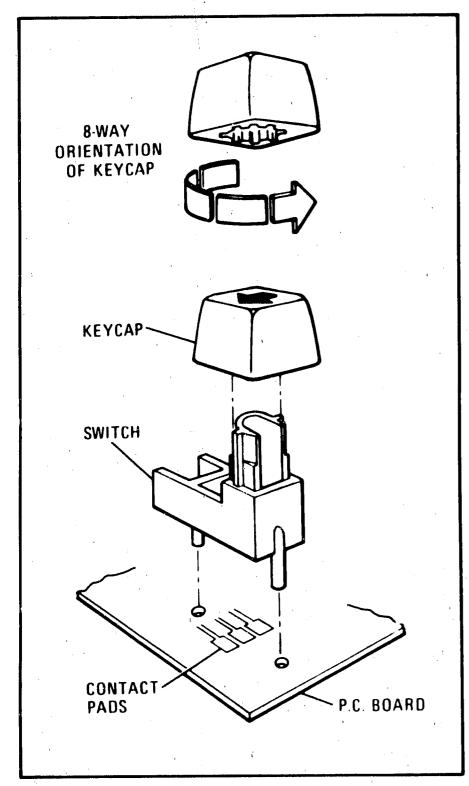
Front-Panel Pushbutton Switch Assembly
